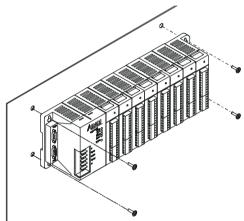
ADAM-5000/TCP panel mounting screw placement
